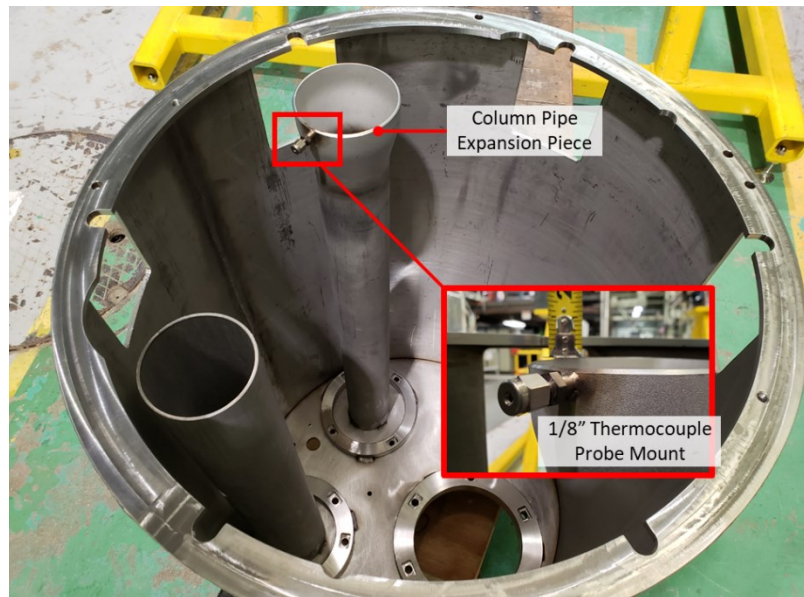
Column pipe expansion piece shown with 1/8" thermocouple probe mount location highlighted. A thermocouple is installed at this location to determine maximum pump performance, before sodium begins to flow out of the top of the column pipe due to high pump case pressure
